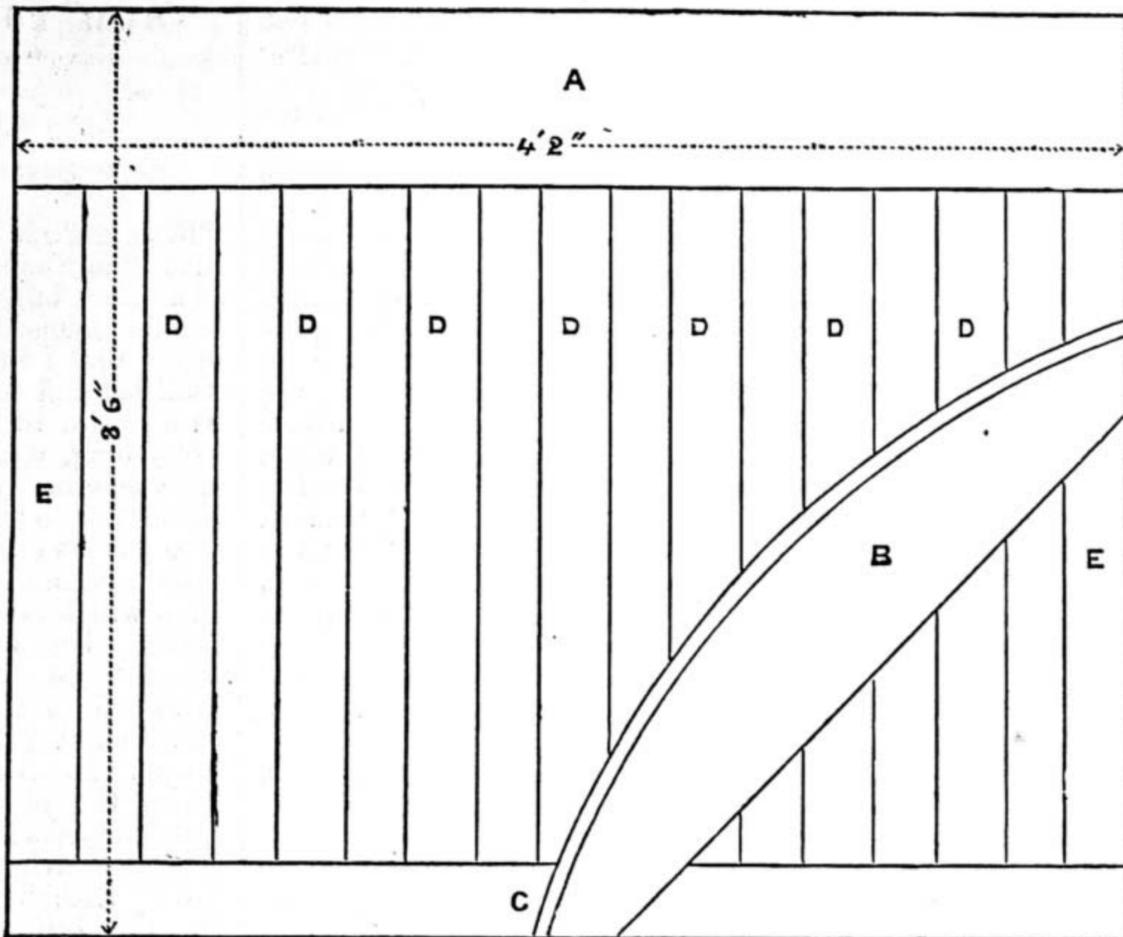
Front View of Back—A, Wrest Plank. B, Bent Side. C, Bottom. D, Bracings. E, E, Linings. (Scale, 1 inch to 1 foot.)
